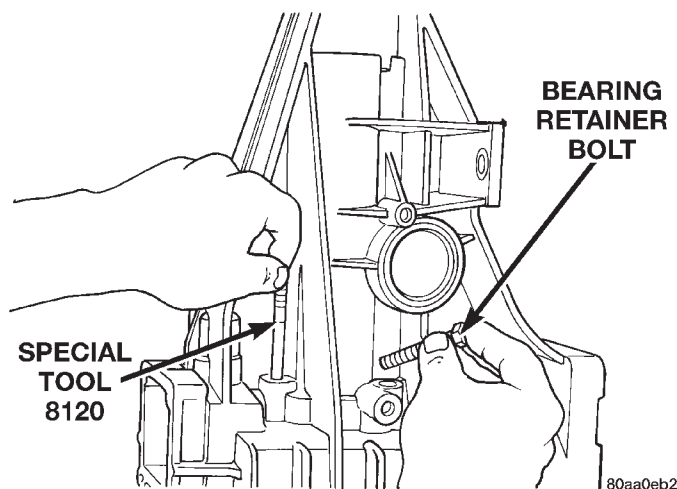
Removing Pilot Stud Tool And Installing Retainer Bolts—2WD
